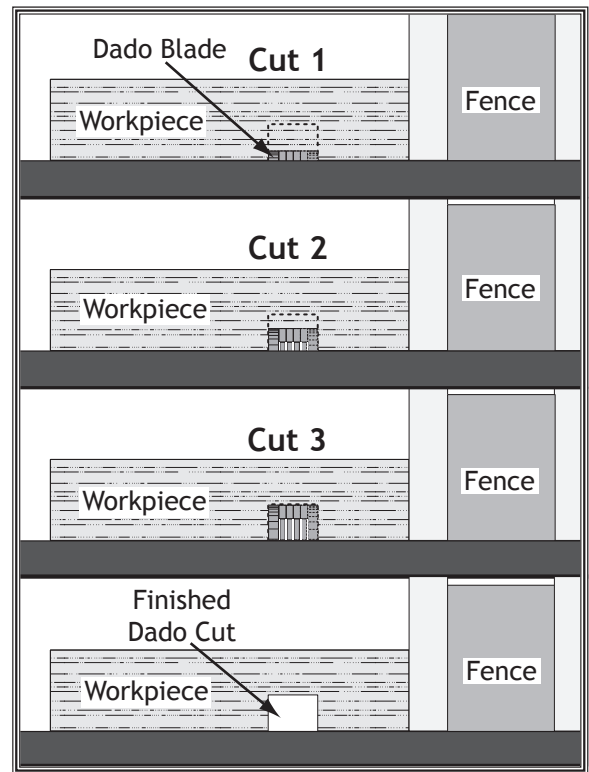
Example of dado being cut with multiple light cuts, instead of one deep cut.
